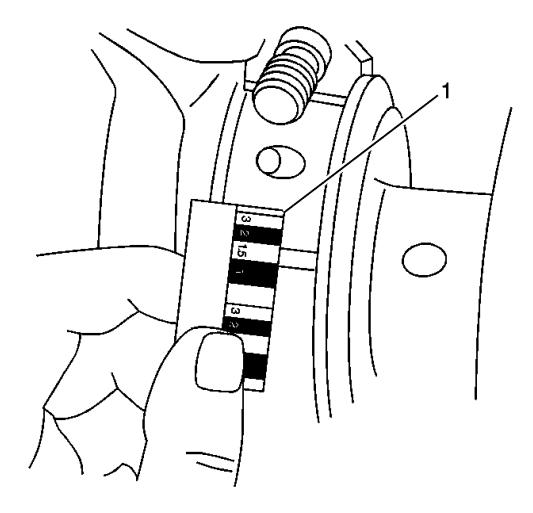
Measuring Bearing Clearance With Gaging Plastic Courtesy of GENERAL MOTORS COMPANY
